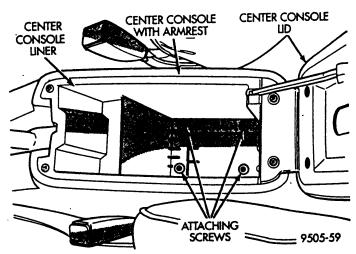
Attaching Screws At Rear Of Center Console With Arm Rest
